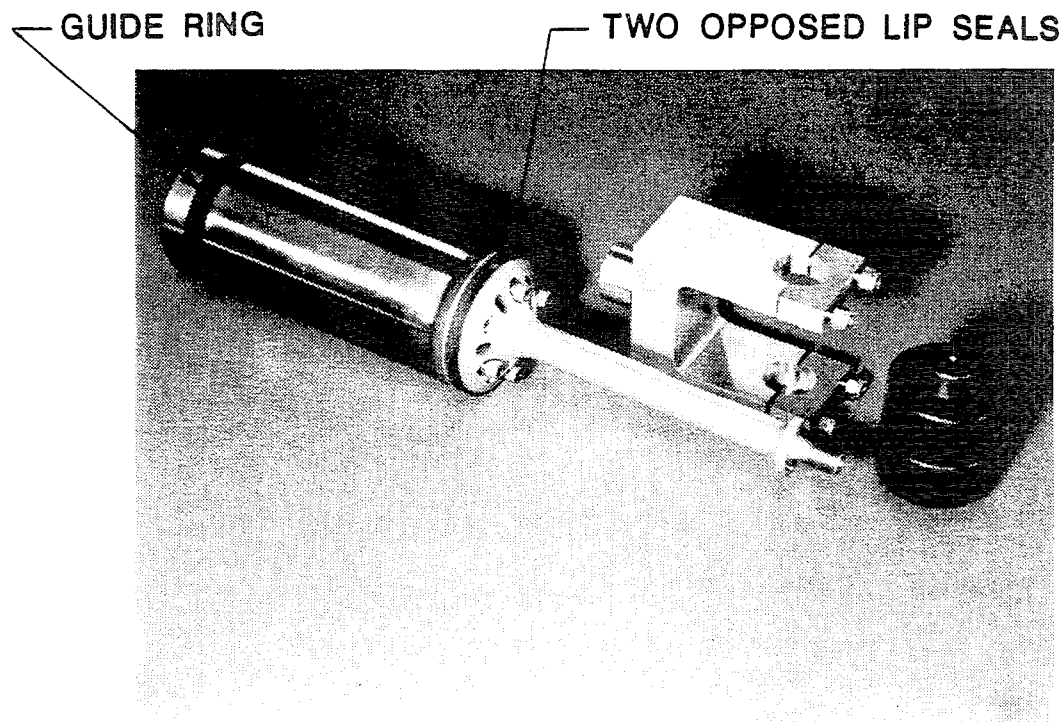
EXPANSION PISTON WITH GUIDE, LIP SEALS, TWO-PIECE CONNECTING ROD, AND JOURNAL
